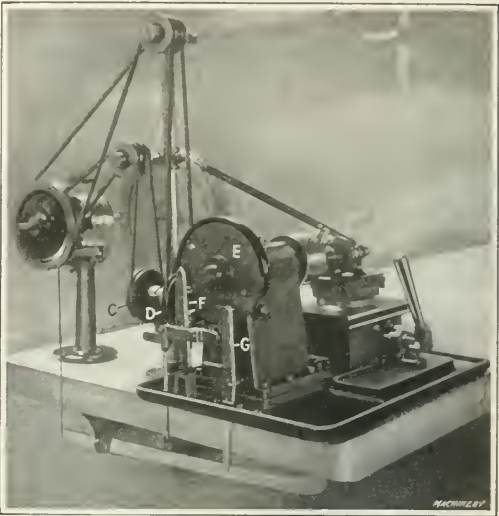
Lundvall Machine for finish-milling Powder Train Groove in Time Fuse Rings
